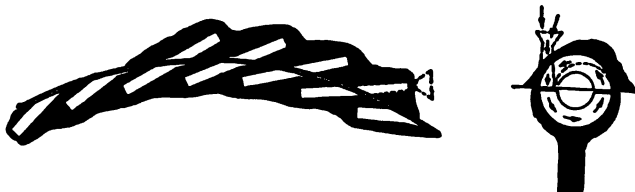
ARRANGEMENT OF BUCKETS AND REVERSING CHAMBER TERRY TURBINE.
